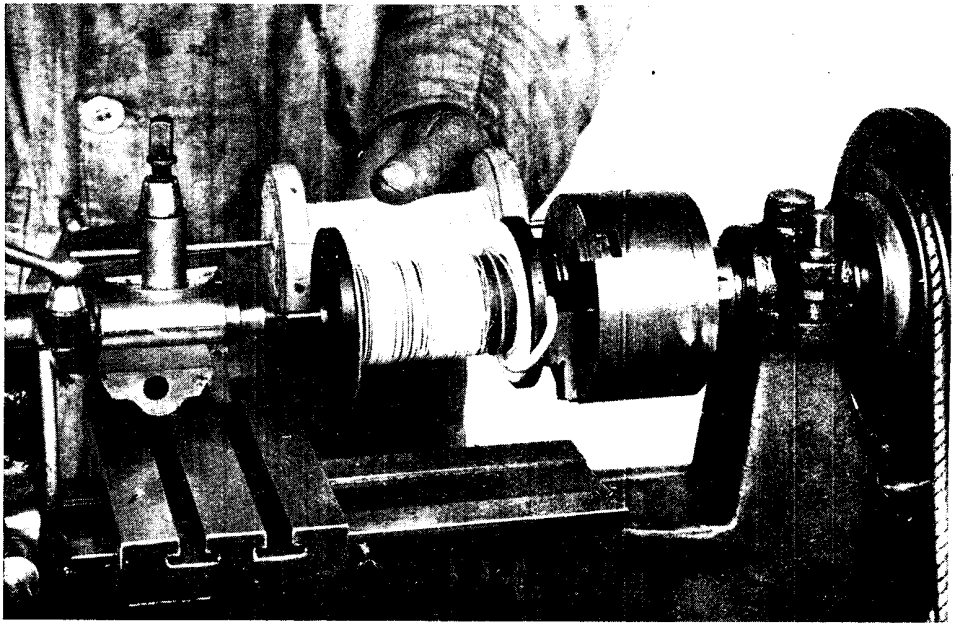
One excellent method of winding the bobbin for the transformer is to mount the spool of wire on a round rod attached to the tool post of the lathe in such a way that the spool is free to revolve easily. The use of the lathe simplifies considerably the otherwise tedious task of winding
